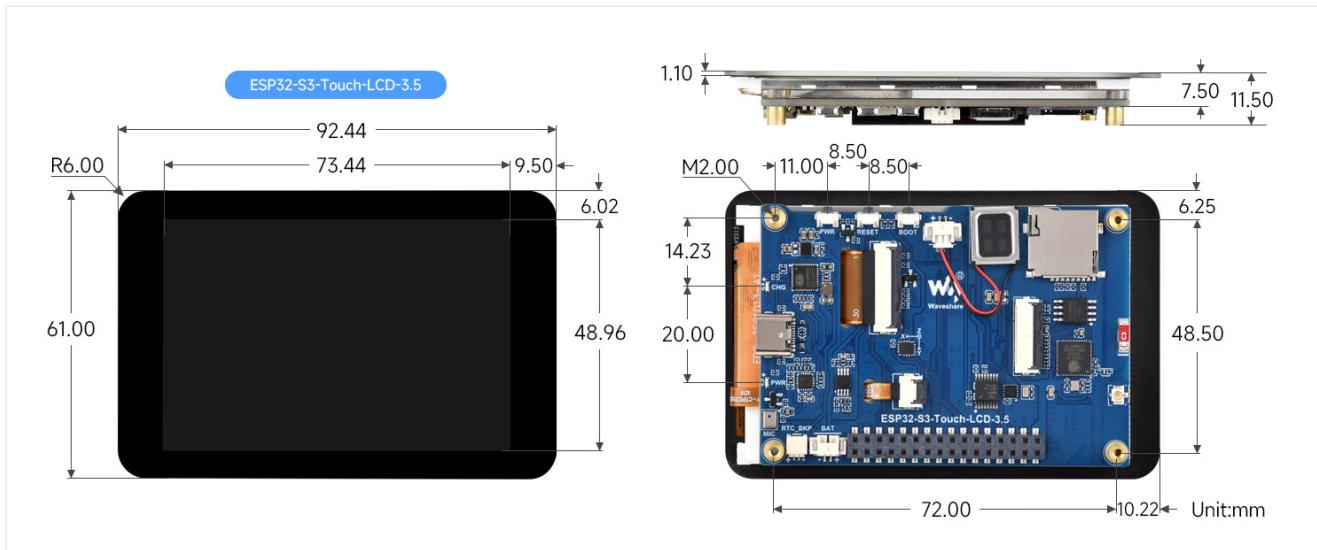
Standard Version Dimensions. This technical drawing provides precise measurements for the ESP32-S3-Touch-LCD-3.5 board without a case, in millimeters.
